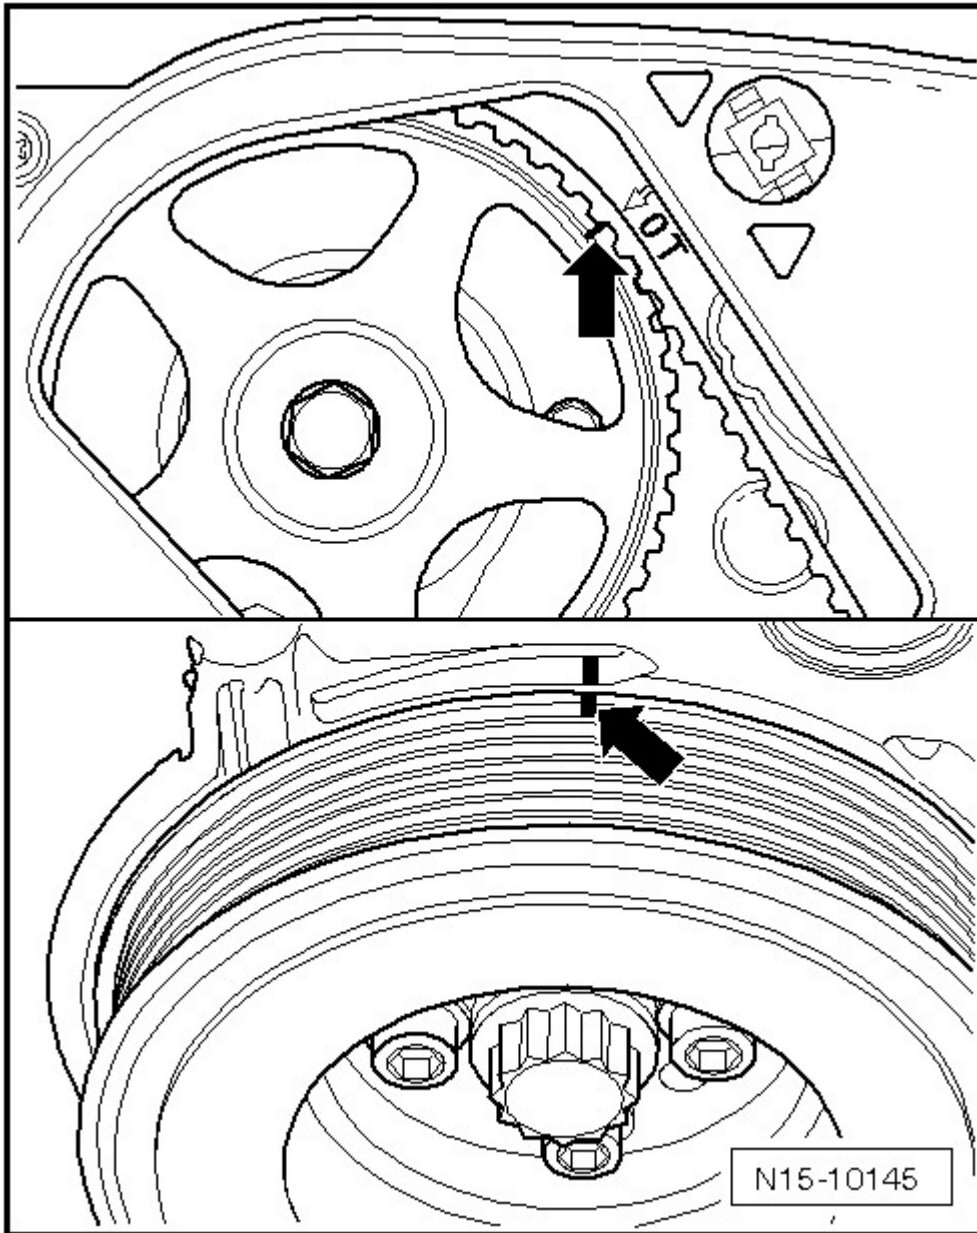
Bringing Camshaft Gear To Marking For TDC Cylinder 1
